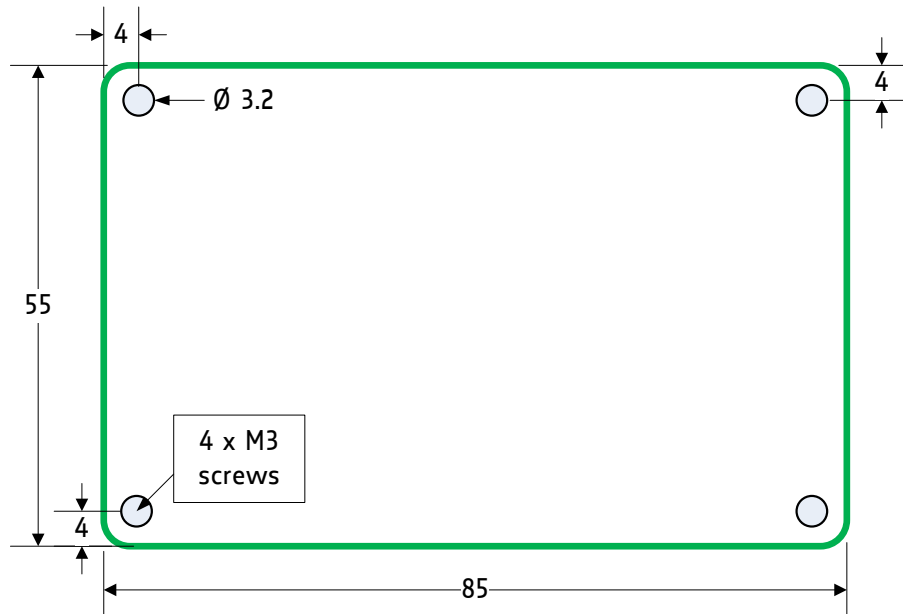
Board Dimensions and Positions of Mounting Holes (all Values in mm)
